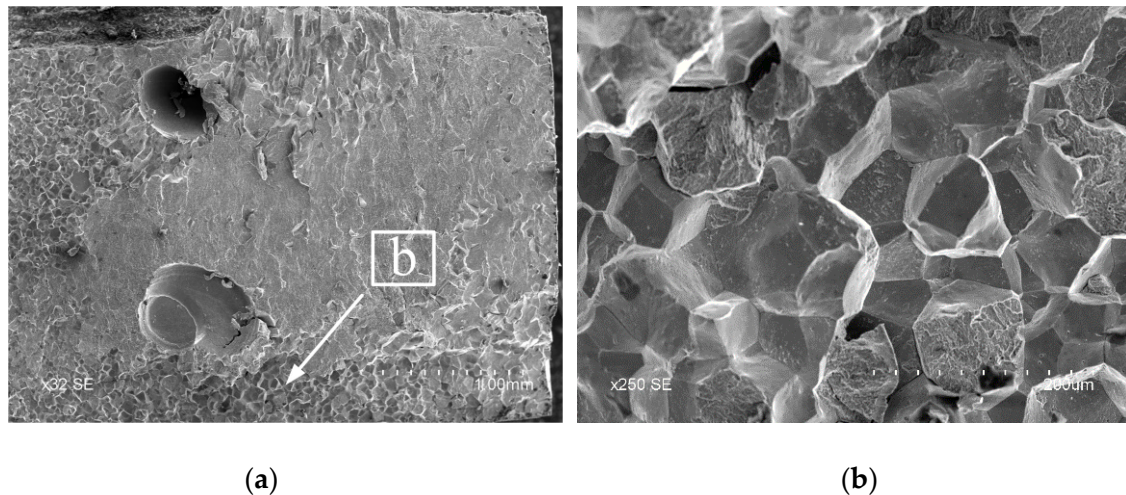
The fracture of the weld without preheating in plane fracture toughness test: (a) The overall morphology; (b) the enlargement of b.
